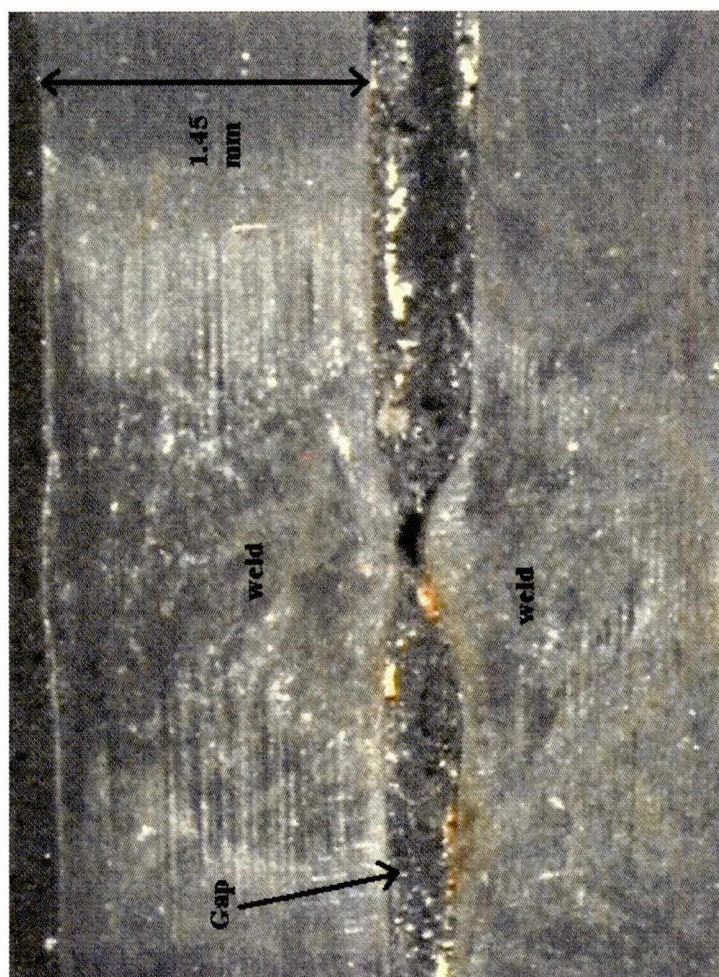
Gap Causing Lack of Fusion. Weld performed on 80Y90T autobody component using a CO₂ laser and helium gas (1850W, 1000mm/min., +1mm focal position).
